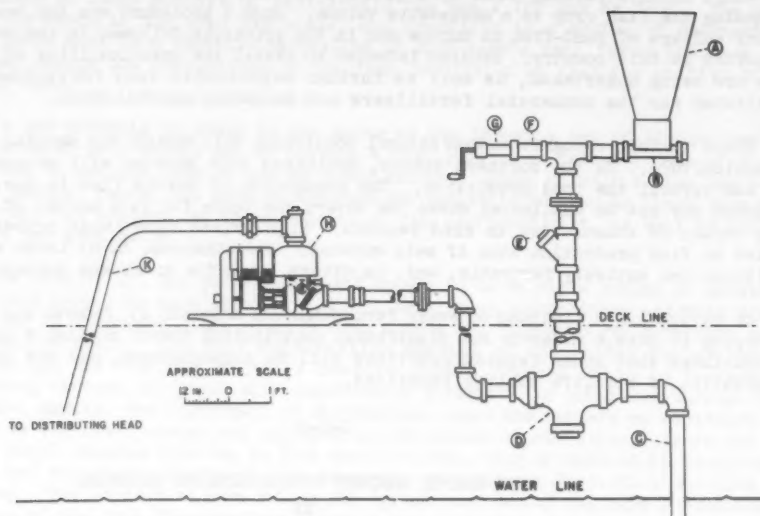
ASSEMBLY OF LIME MIXING AND PUMPING UNITS
